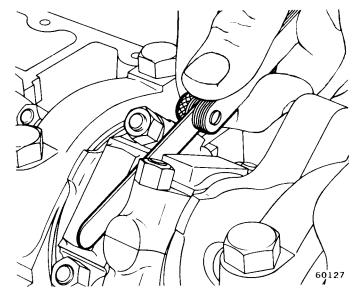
B-32 Connecting Rod Side Clearance Measurement
